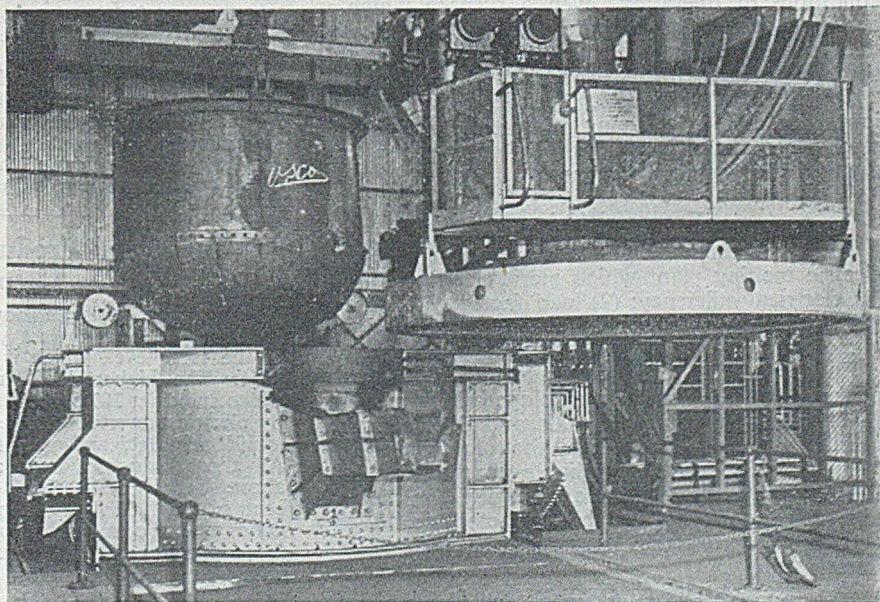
"Tulip" Basket, holding the Charge of Steel Scrap ready for discharge into the Furnace Body, the Furnace Roof having been Slewed Sideways for this purpose.
